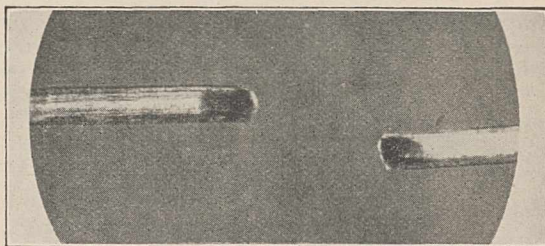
Same specimen photographed in a plane at right angles to that of Fig. 1, showing no reduction in diameter in this plane.
